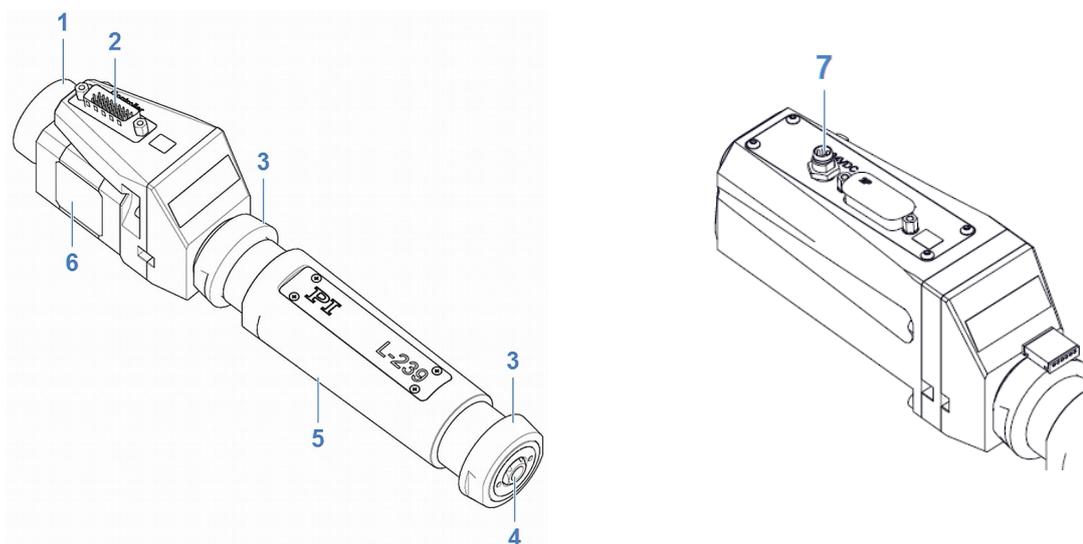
Parts (left: L-239.50SD, right L-239.50AD (detail))
